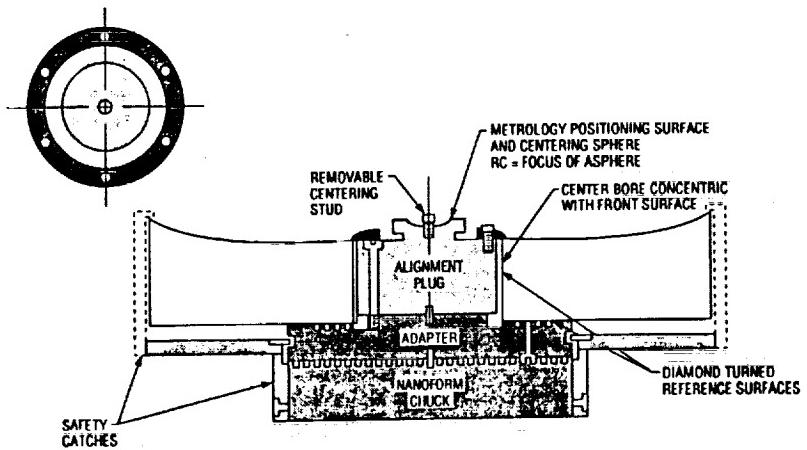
Fixturing Scheme for 400mm Diameter Parabola
